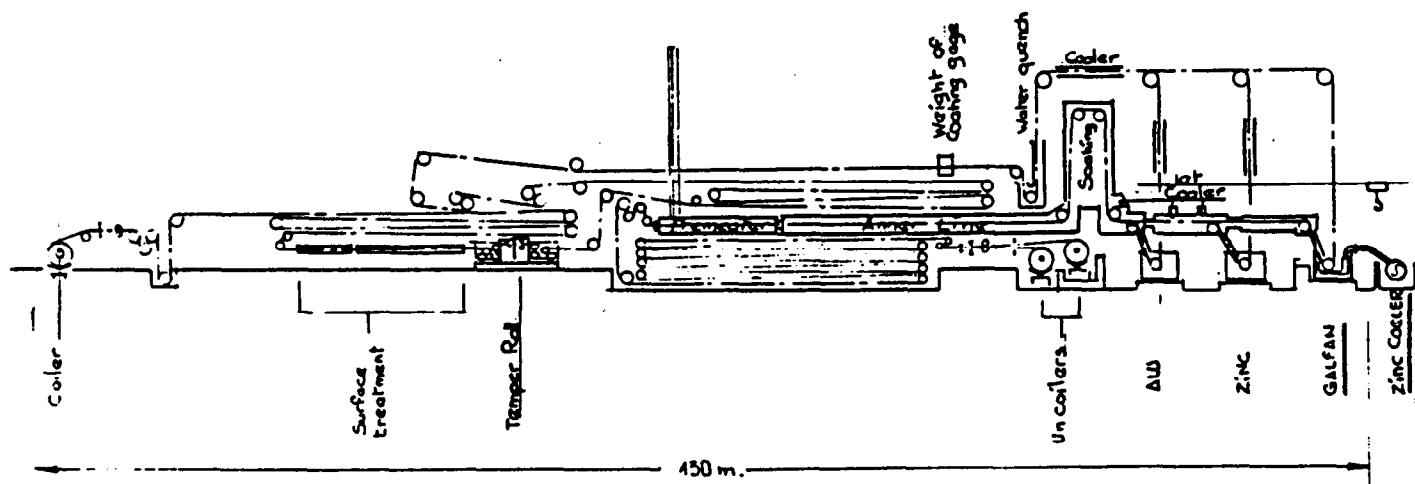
The Ziegler , Mouzon, hot-dip galvanizing line n:o 2.
